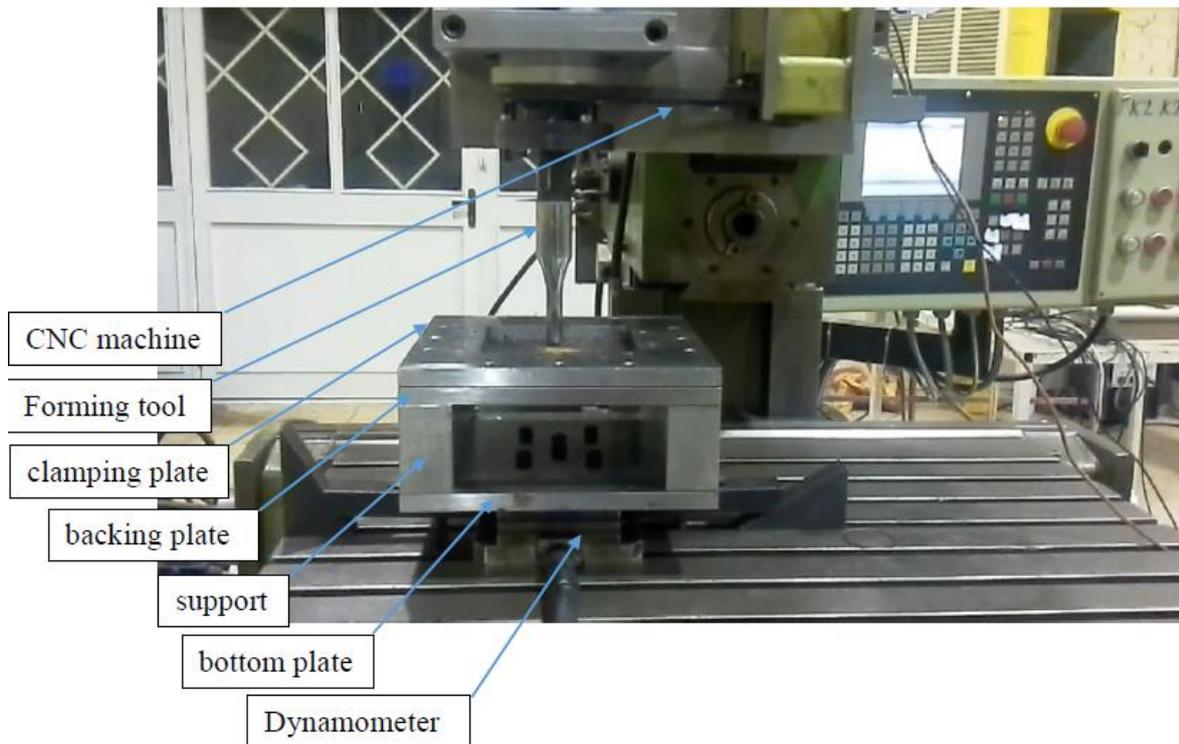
SPIF experimental setup mounted on a CNC milling machine.
